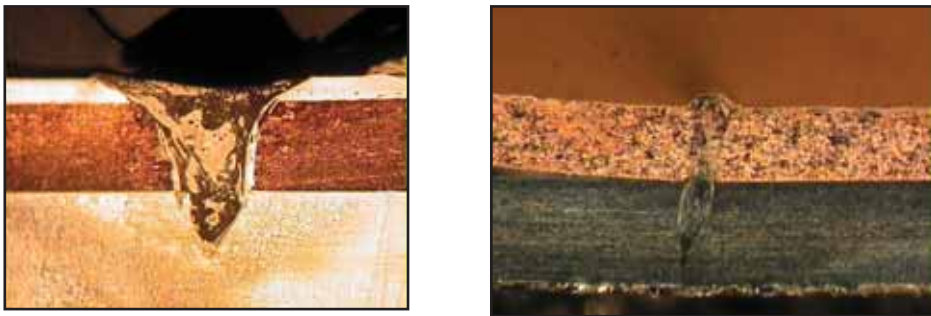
Laser welding examples of thick conductive tab welding. (a) Nd:YAG laser 0.02 inch thick steel clad copper tab to steel (b) fiber laser weld 0.012 inch thick copper to thin stainless steel.
